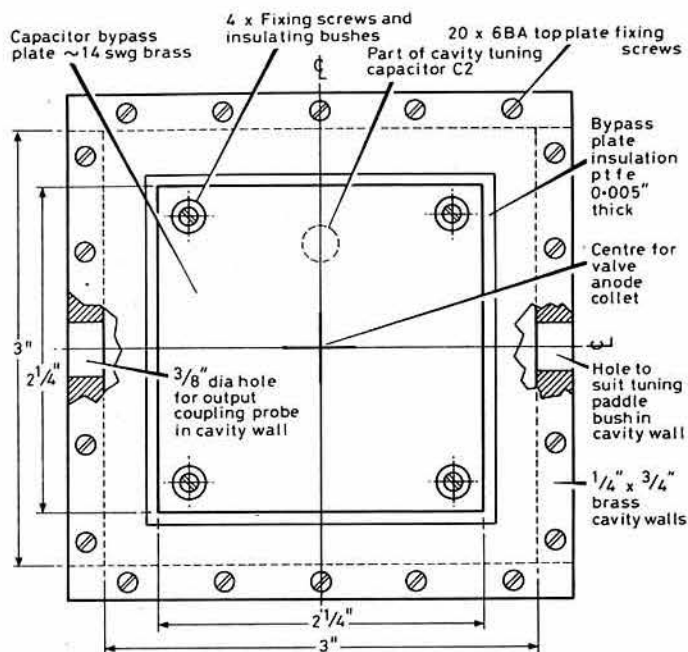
Top view of anode cavity assembly. The cavity top-plate has a 1.25in diameter hole in the centre, to clear the valve anode sleeve
